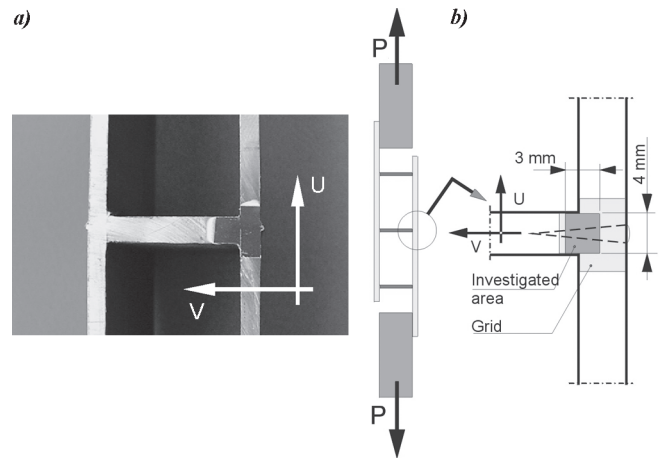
The specimen with the glued laser grating (a), and the measurement field location relative to the laser weld (b)
